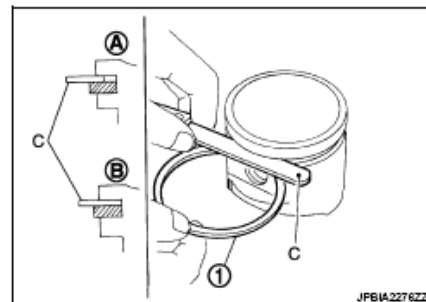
Measuring Side Clearance Of Piston Ring And Piston Ring Groove
